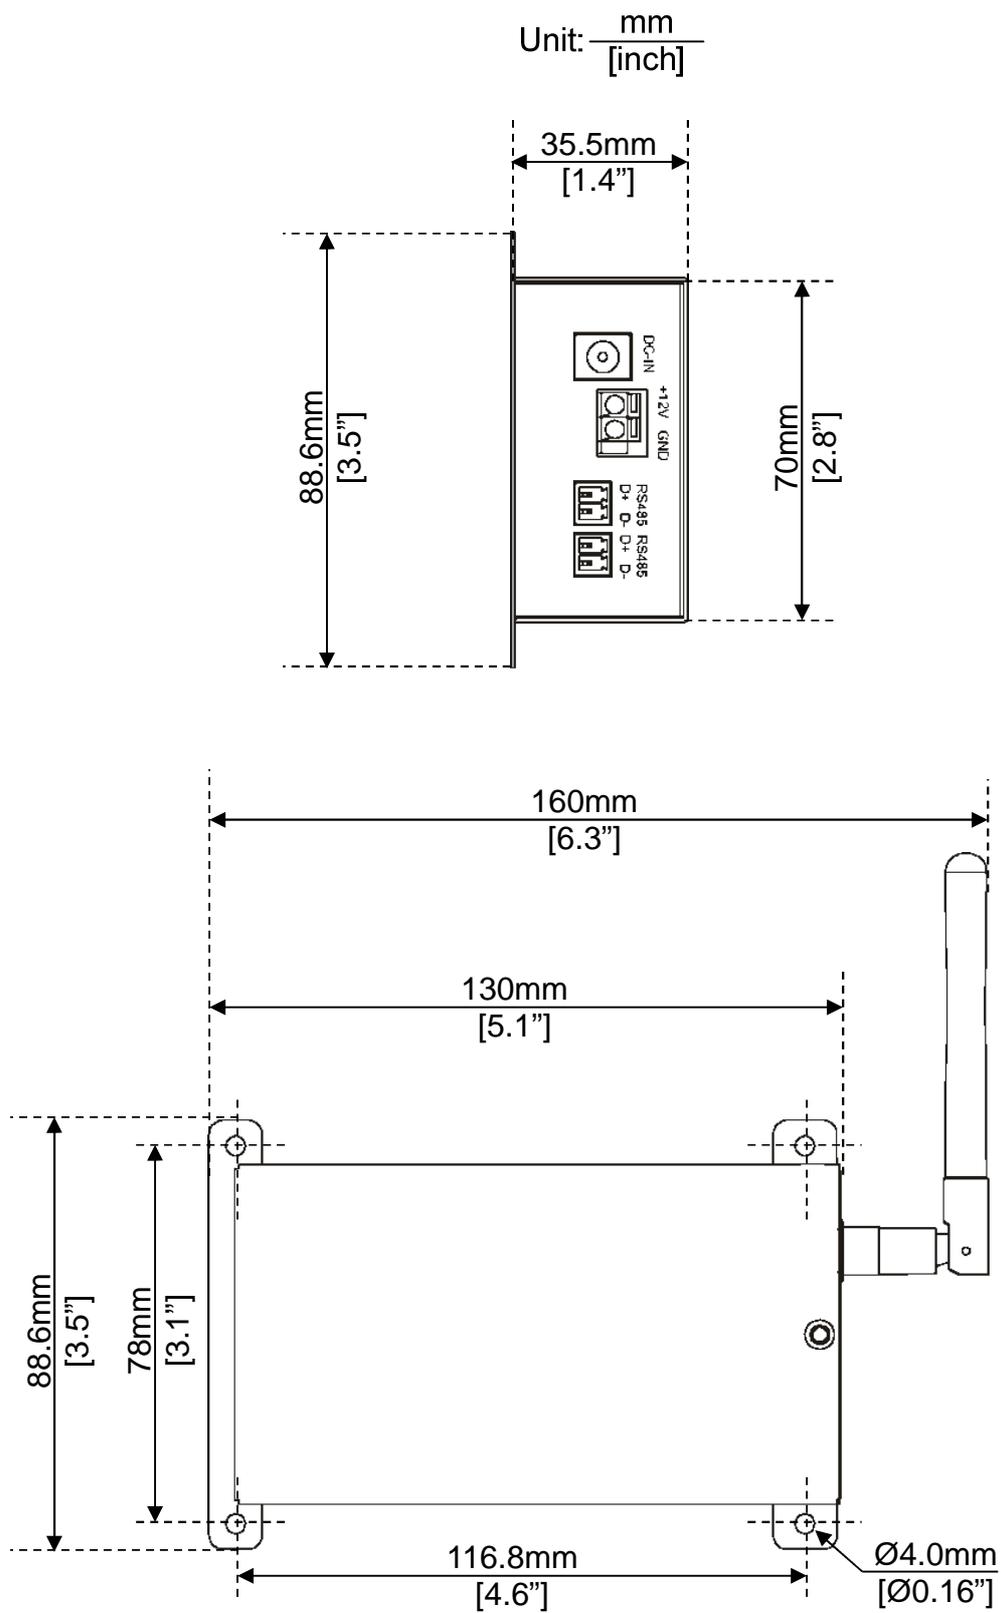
RF Receiver (RFR) Dimension Drawings
